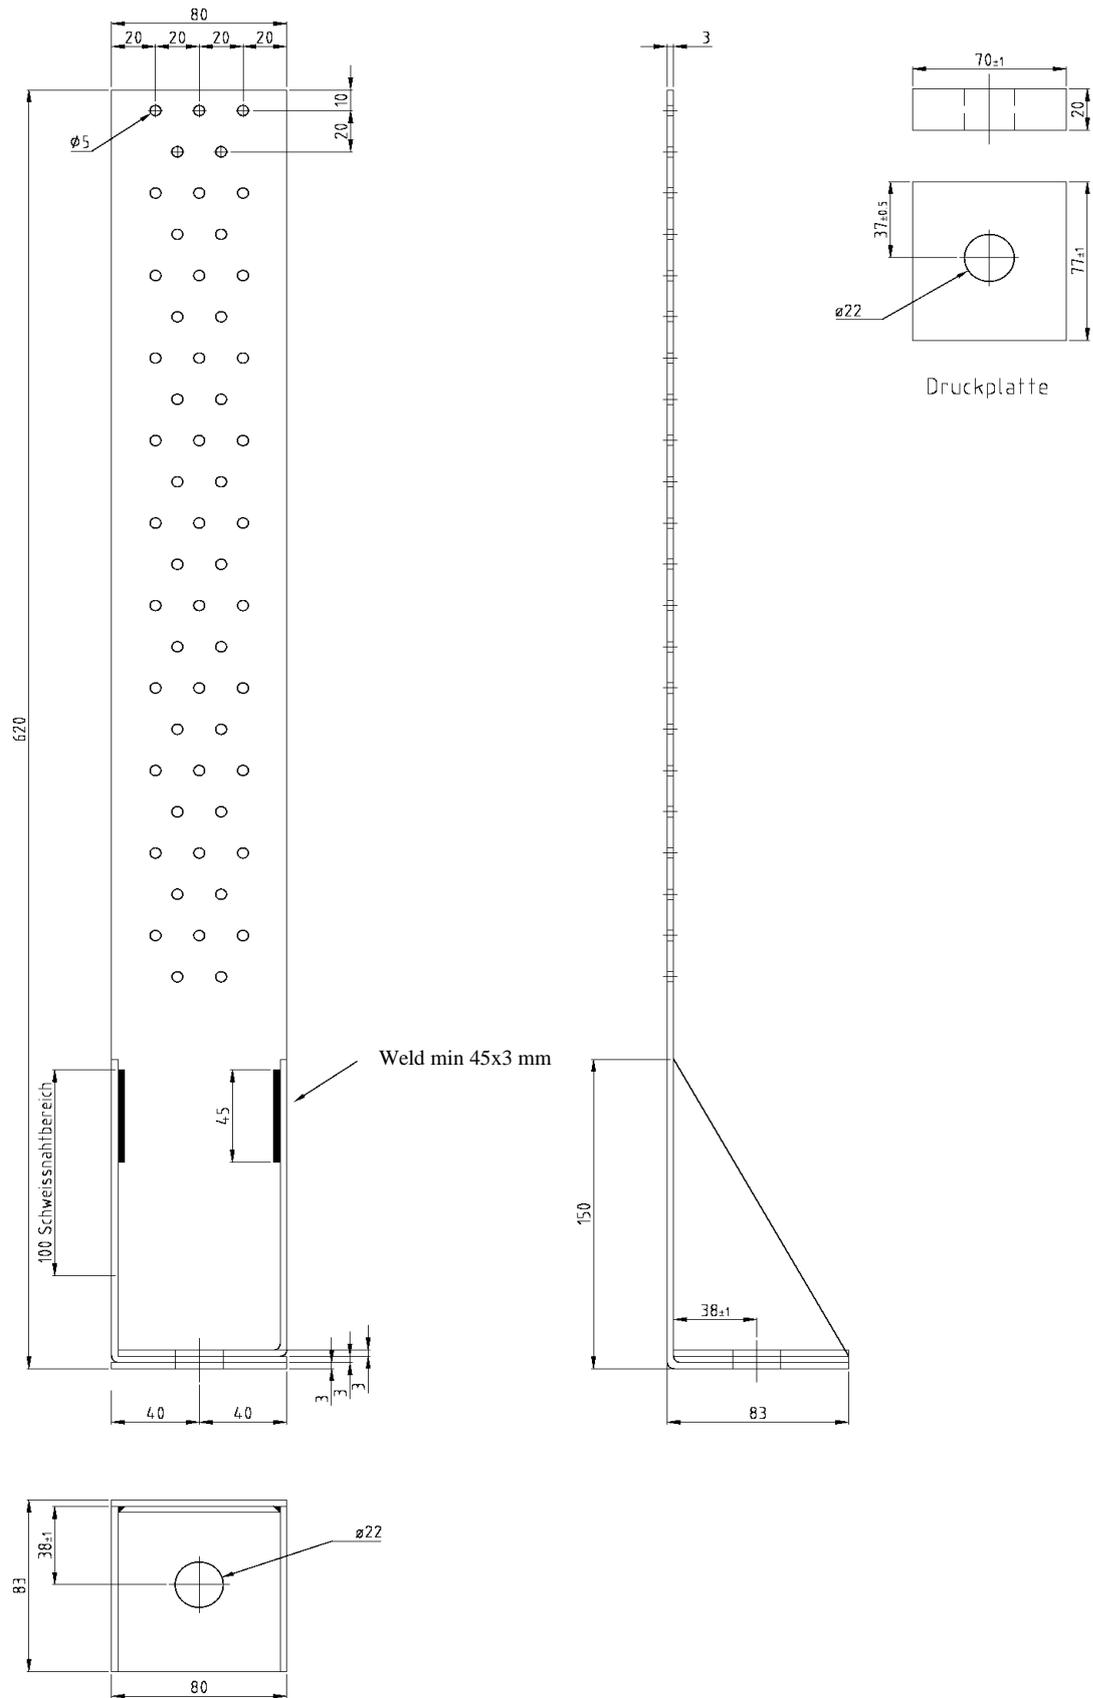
Dimensions of type GH HT34 80/620 (drawing with washer 77x70x20)
